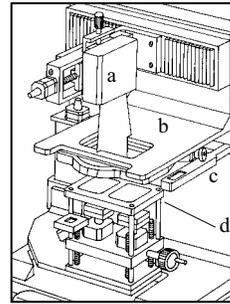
Mask welding system for assembly of plastic microfluidic device. a) laser source, b) micro alignment, c) vision system and d) clamping pressure system.
